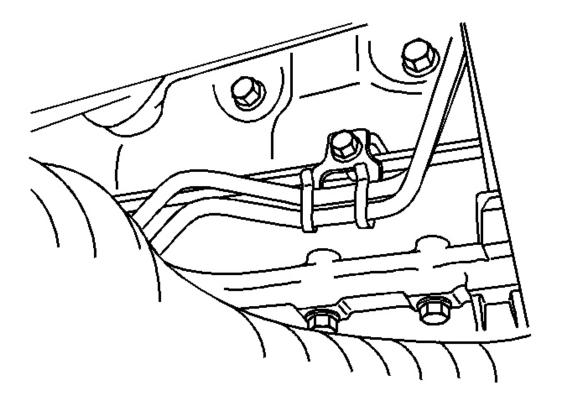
View Of Transmission Cooler Lines & Clips Courtesy of GENERAL MOTORS CORP.
